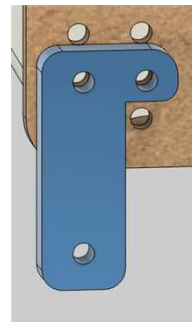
Passive Wheel Holder (3D Printed with Infill 90% for Robustness)
